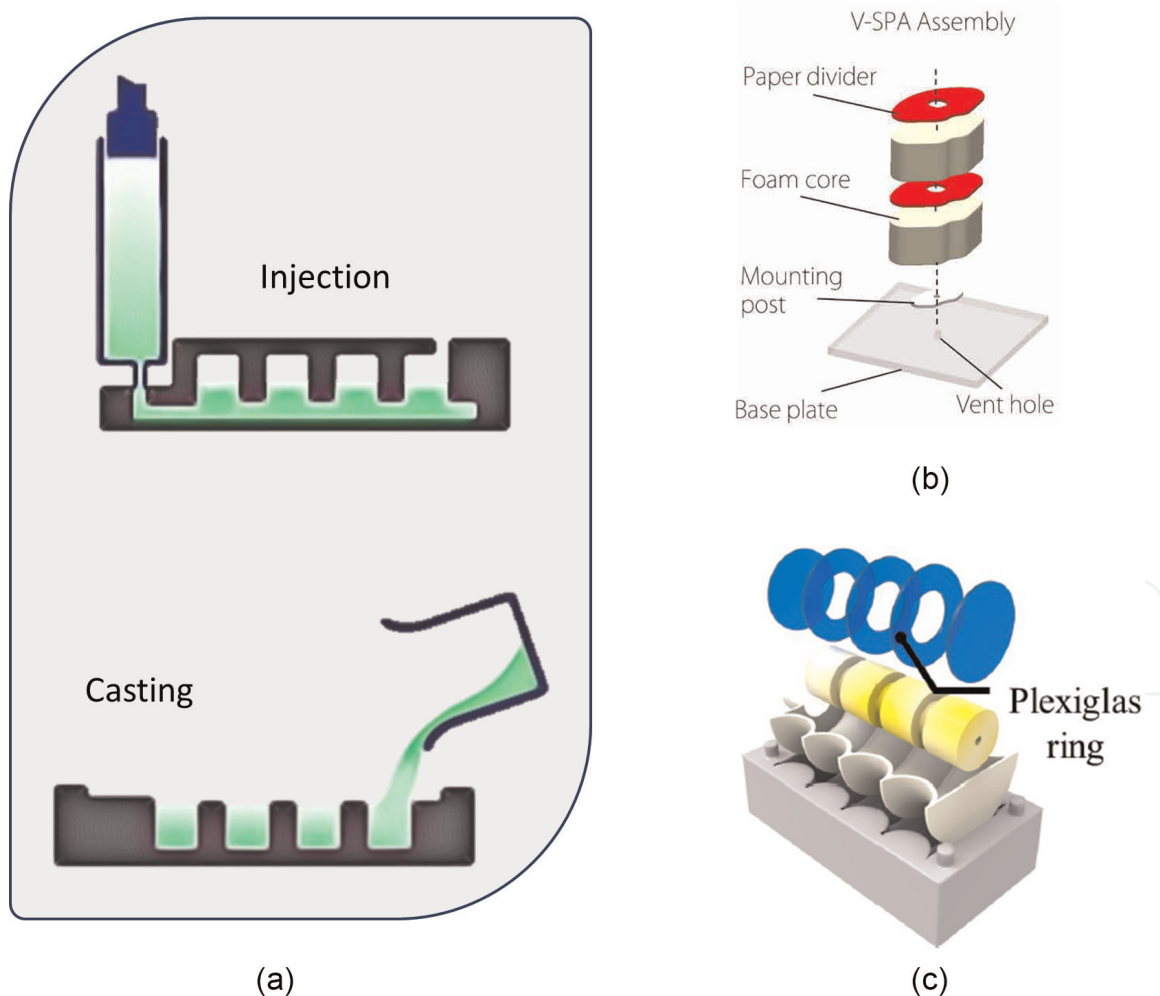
Different fabrication techniques. (a) shows different filling methodologies - Injection and casting molding, respectively. The hybrid fabrication processes combining two or more techniques - (b) encasing the foam core with the elastomer and smoothly merging each module by interfacing paper dividers. Reproduced with permission [94]. (c) a bellow type actuator (UH-PAM [38]) with foam modules and Plexiglas® rigid rings interfaced at each convolution of the elastomeric bellow skin [38].
